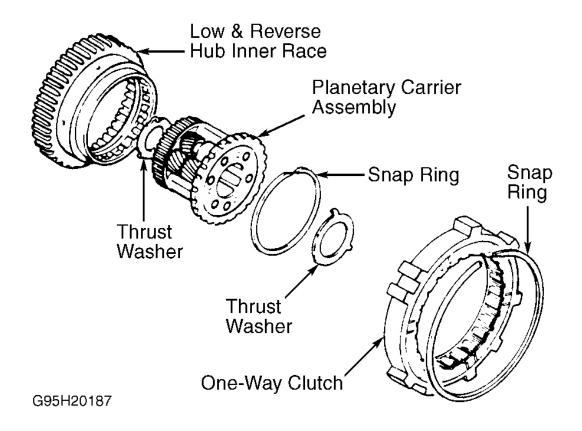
Exploded View Of One-Way Clutch No. 2 & Planetary Carrier (GF4A-EL Shown, FA4A-EL Similar)
